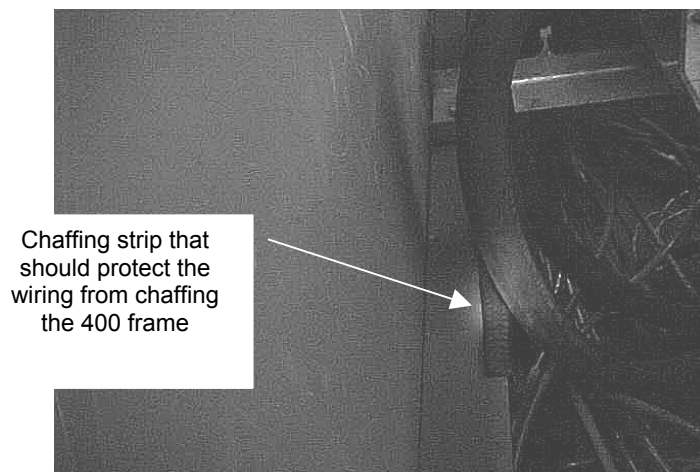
Photo showing the chaffing strip that should protect the wiring from chaffing the 400 frame
